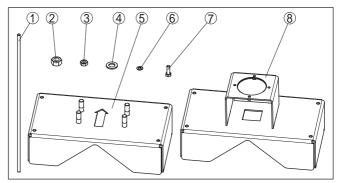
Mounting bracket for pipes irradiated at right angles KV 31 - horizontal sensor mounting
